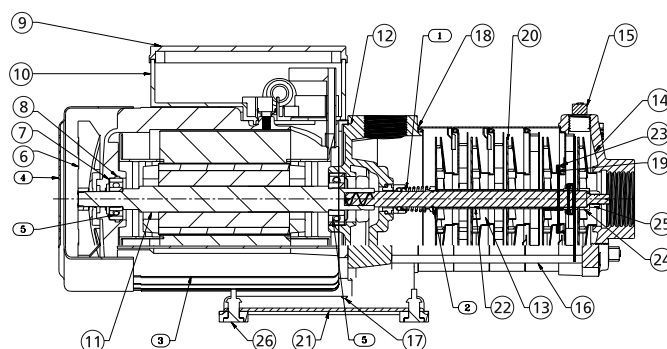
SH, SHI & SHN 4 with SMG 80 motor
